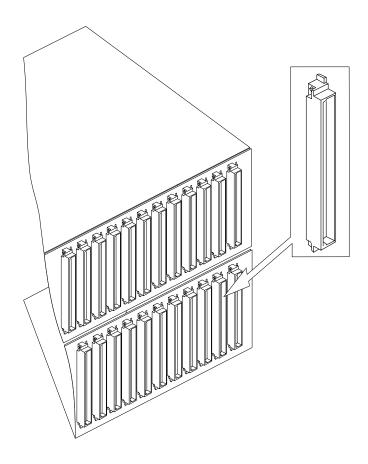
VMEbus Chassis with Shrouded Backplane Connectors
